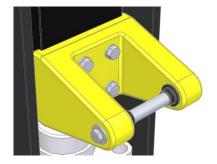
Shaft inserted and fastened in the upper bracket joint.
